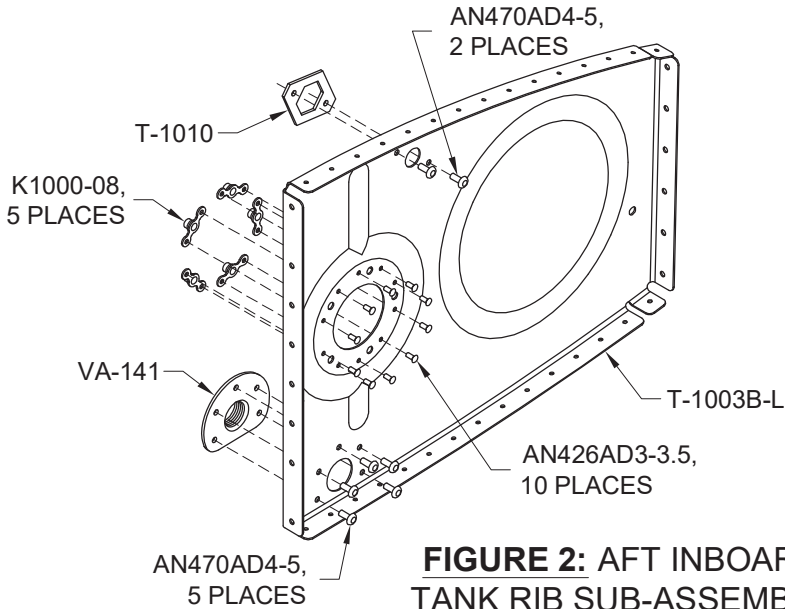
AFT INBOARD TANK RIB SUB-ASSEMBLY
